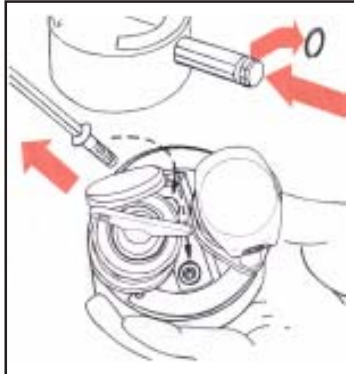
Remove circlip and slide lever out, remove adaptor fixing screws.
